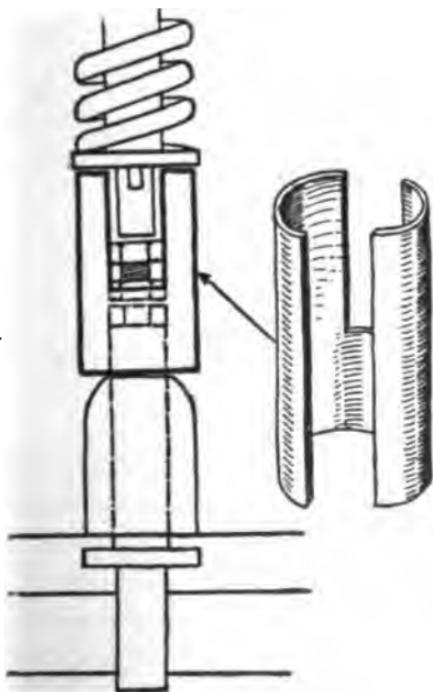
A Substitute for a Valve Spring Remover Which Pushes Spring Away as Motor is Turned
